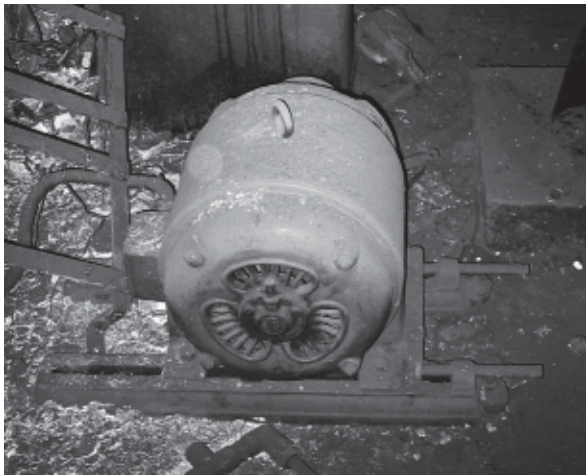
Inserted electric motor powering concrete grinding troughs on second floor of the former Arundel Street Forge (building G) © University of Sheffield. Reproduced by permission
